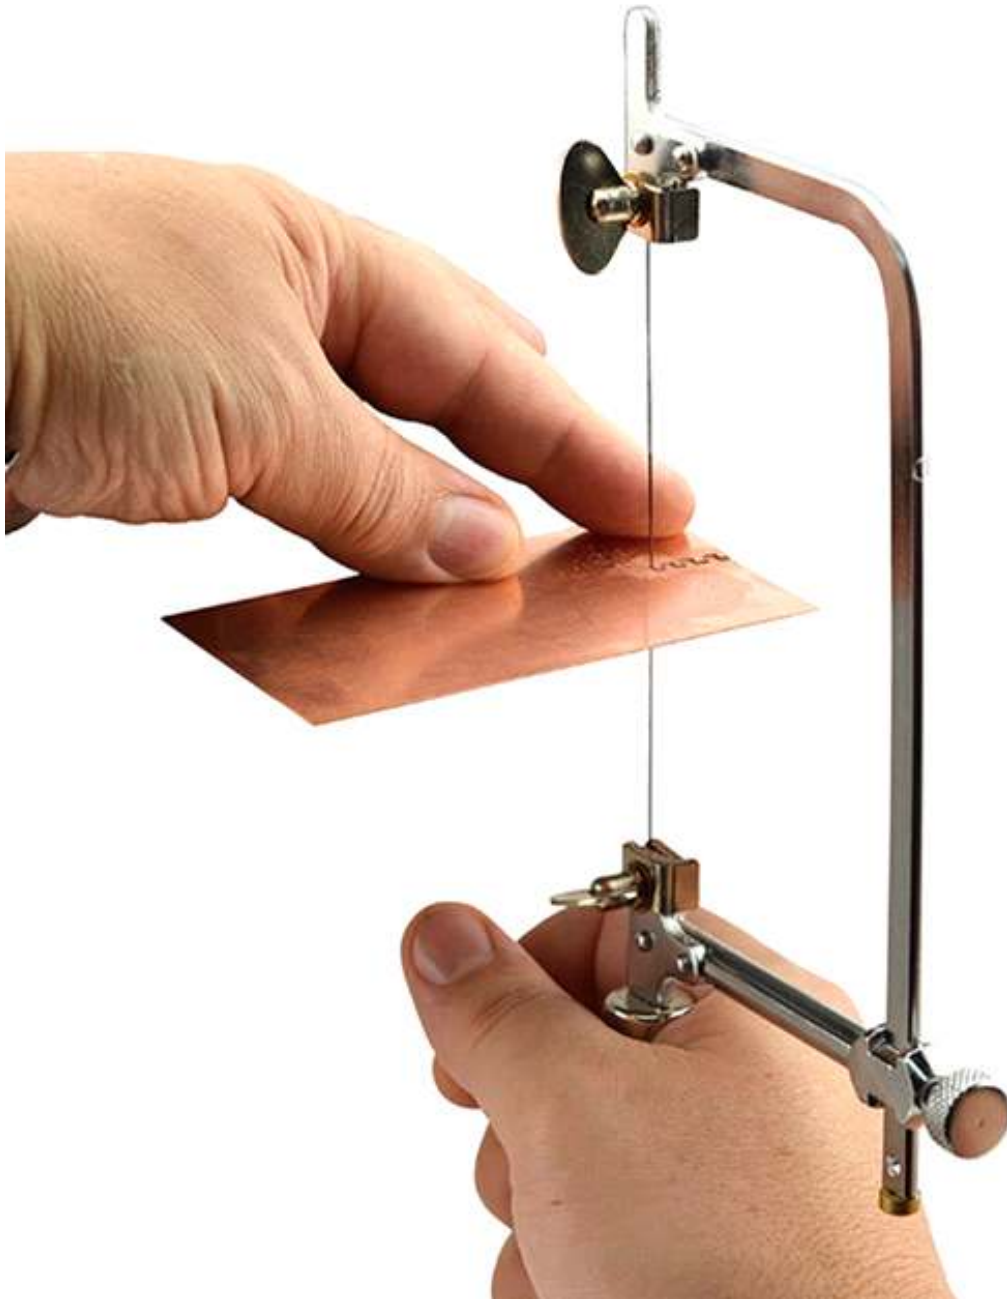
Saw Frame and Blade – Cutting Frame of Jewellery
